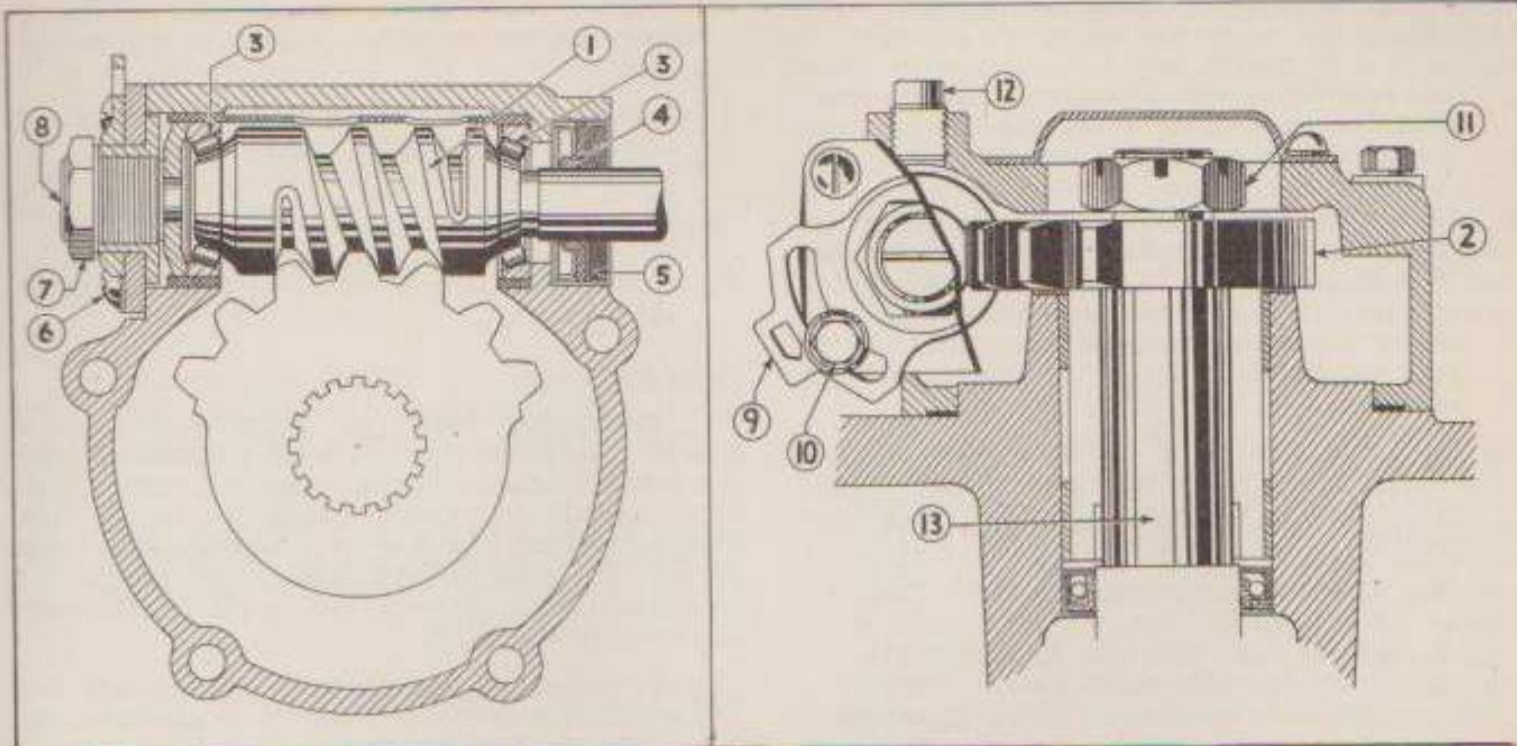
TOP AND FRONT VIEWS OF THE STEERING GEAR
